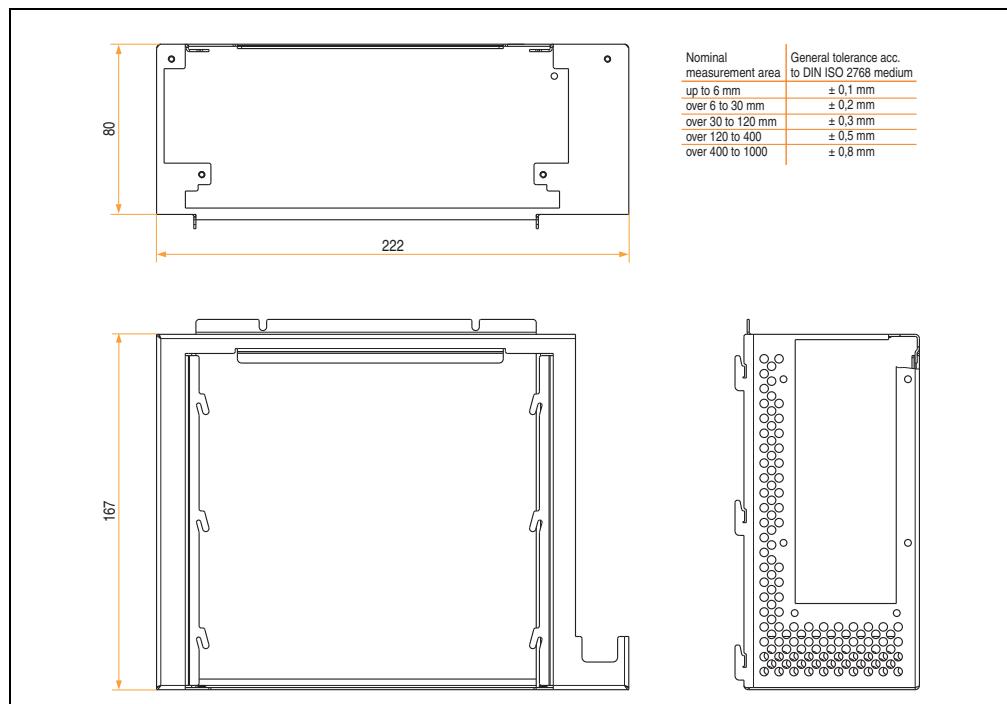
Dimensions - Expansion 5PC803.SX02-00
